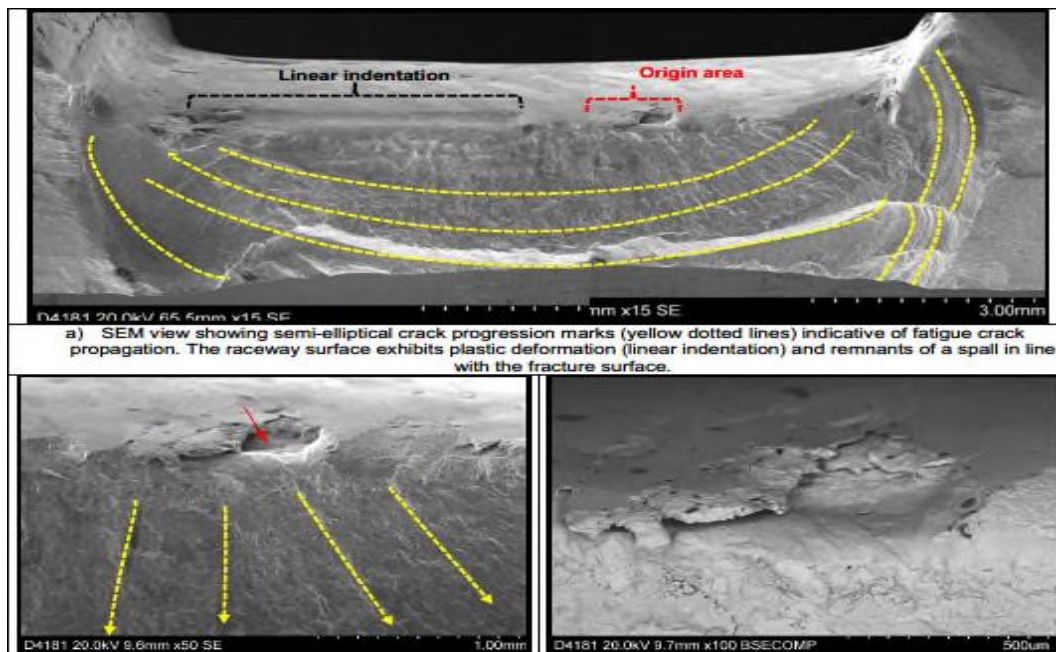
Fatigue cracks on the inner ring [source: P&WC].
